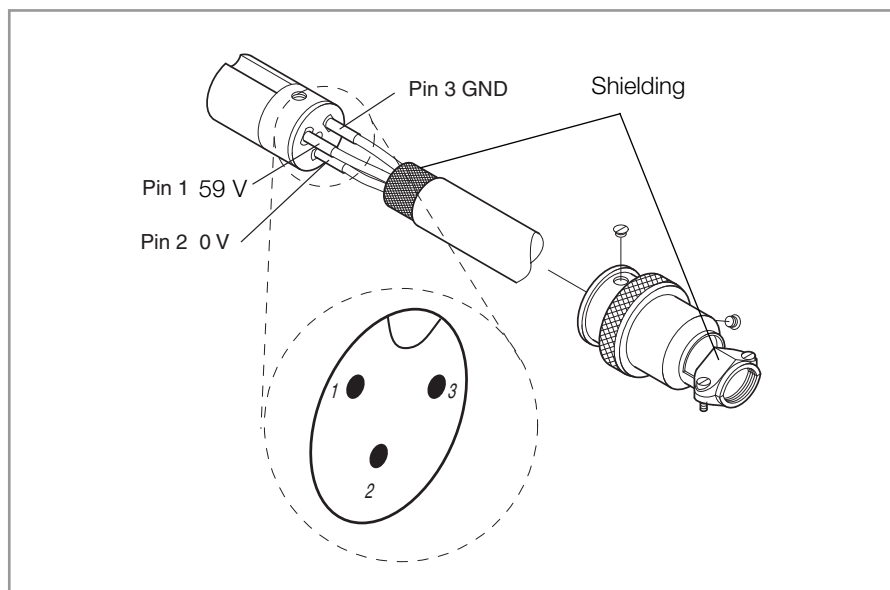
Pin assignment of the DC connector (X4) Model Hirose HS21P-3; view from the soldered side
